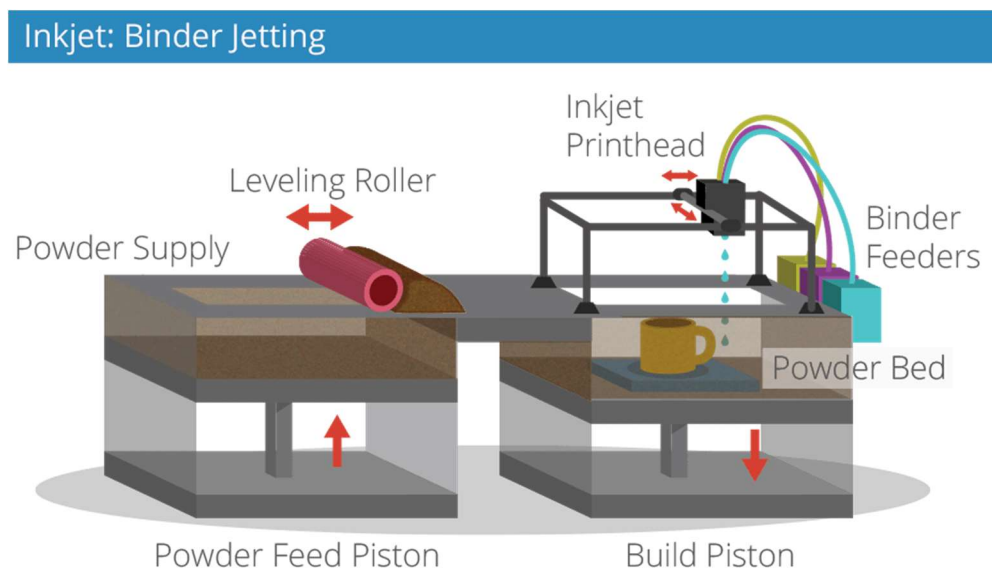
Typical set-up for a powder binder jetting printer [42].
